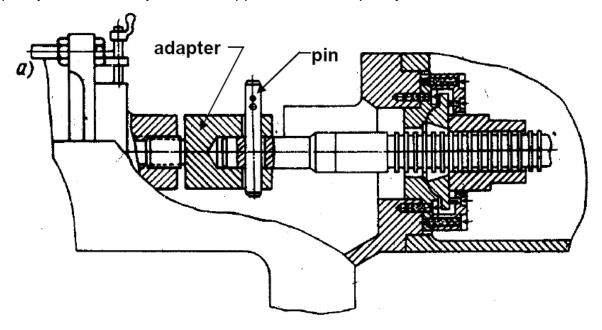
Fitting pull type broach by an adapter and a pin.
